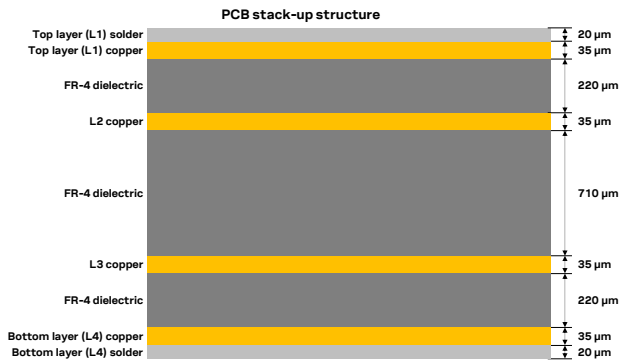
Stack-up structure of the u-blox host PCB for LEXI-R10001D / LEXI-R10011D modules
